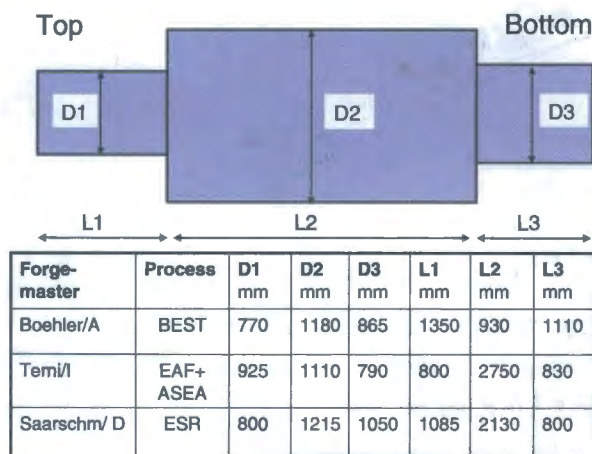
Dimensions of the COST trial rotor forgings in FB2 composition made in Europe
